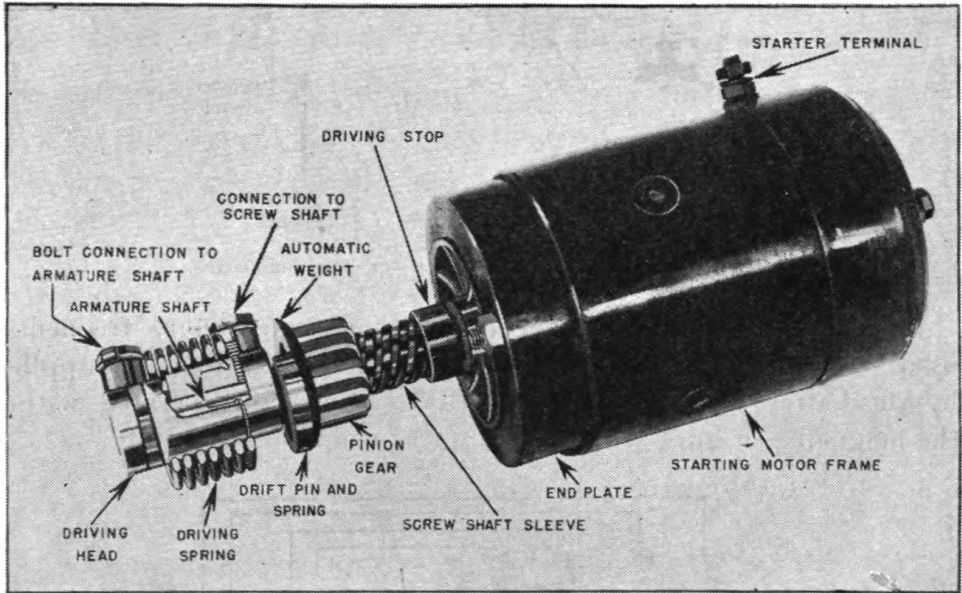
Starting motor with sectional view of Bendix drive assembly.
